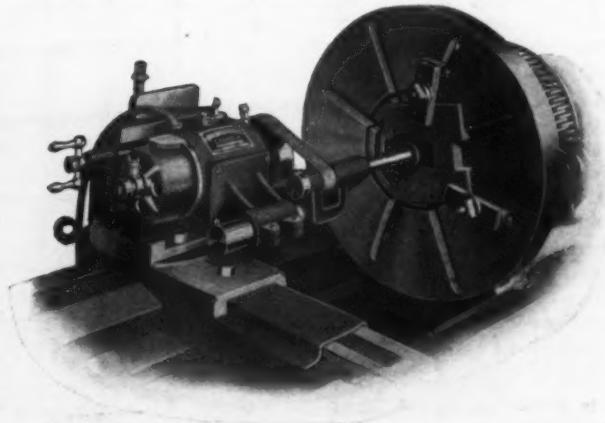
Portable U. S. Electric Grinder with Internal Grinding Attachment.
